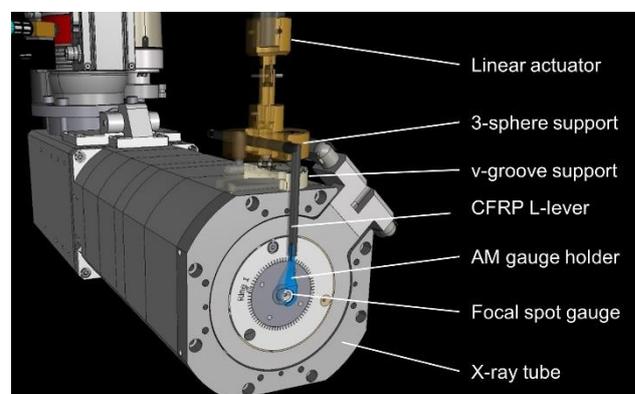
Design of the focal spot gauge manipulator. The gauge is accurately placed in the X-ray beam using a kinematic coupling. Half of the gauge is transparent to render the mechanism visible.
